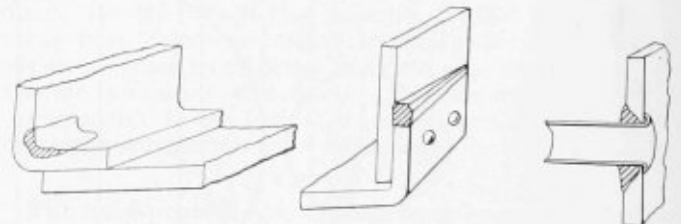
Corroded Plate Fig. 2.—Corroded Fig. 3.—Tube Plate Built Up by Welding Lap Joint Also Re- Reconditioned by Autogenous Process repaired by Welding Process
